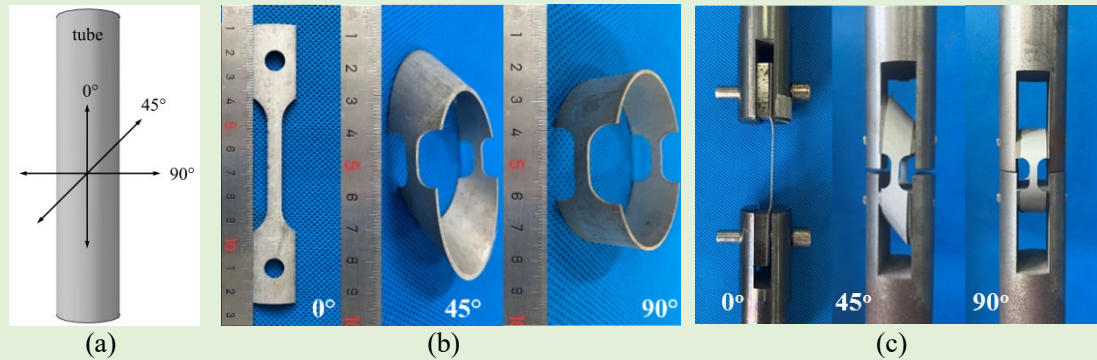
The specimens and collets of axial tension at 0°, 45° and 90° directions: (a) axial tension directions, (b) the specimens, (c) the collets with specimens.
